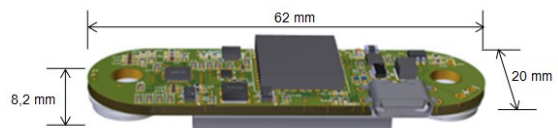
Altium Designer 3D model generated of the PCB finished design.
